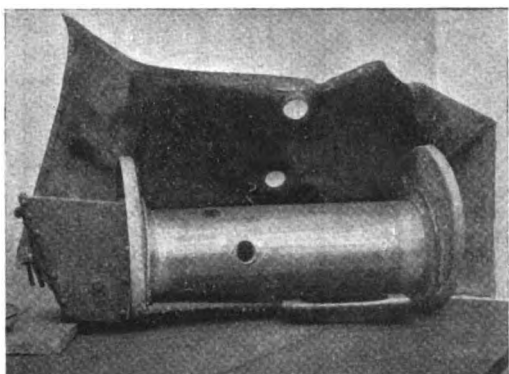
THE BOILER AFTER THE EXPLOSION.
